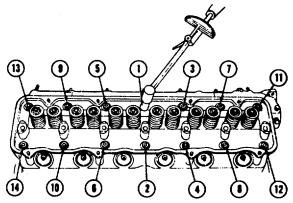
Cylinder Head Bolt Tightening Sequence
